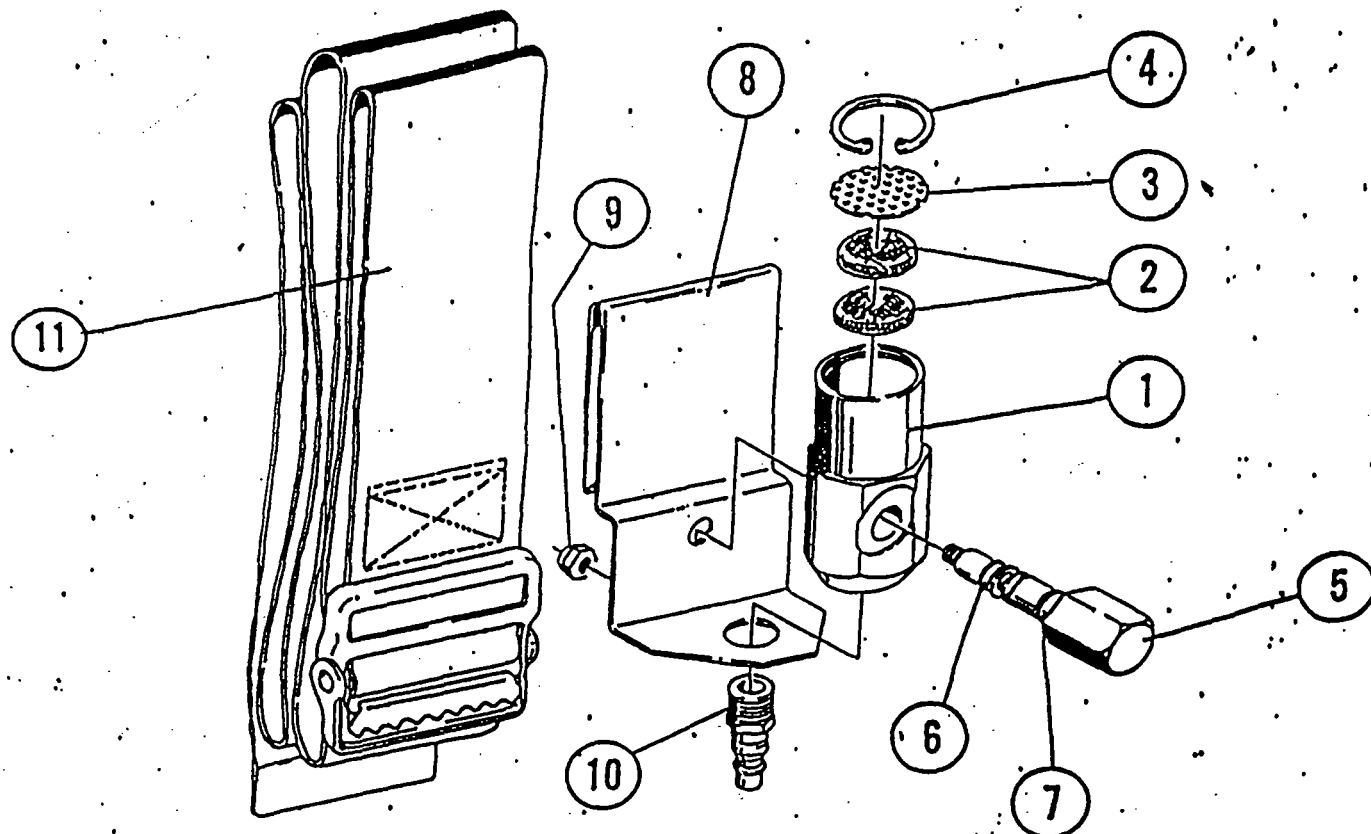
W-2907 Air Regulating Valve — Assembly
